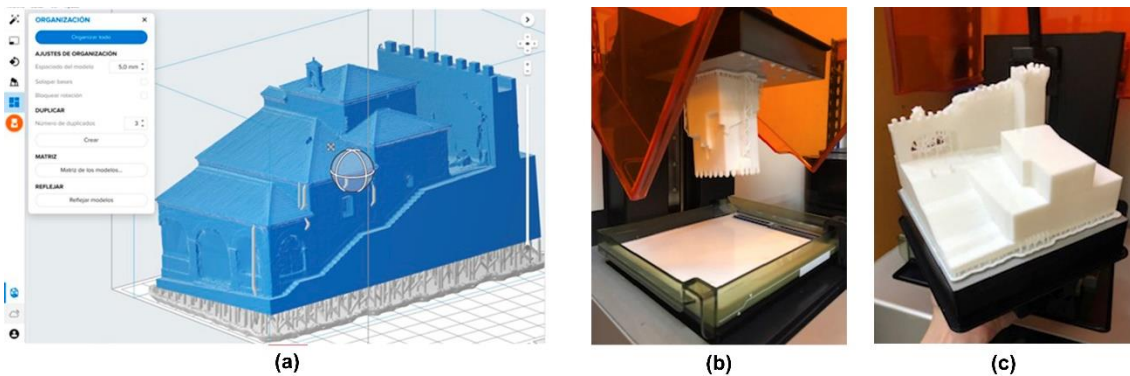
(a) digital twin before printing (b) (c) physical prototype on Form 2 printer
